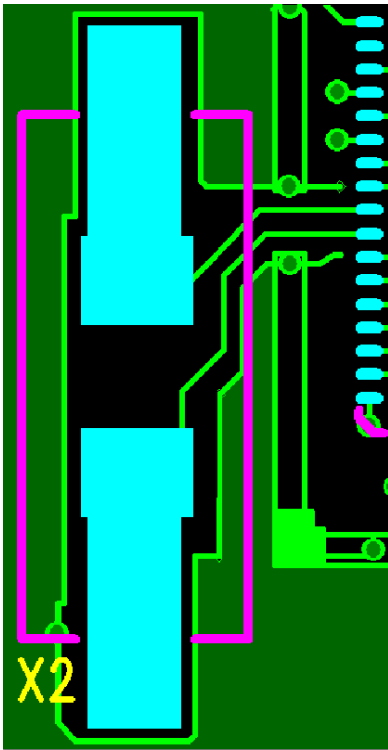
PCB Top Metal Layer Shielding of Crystal Signals
